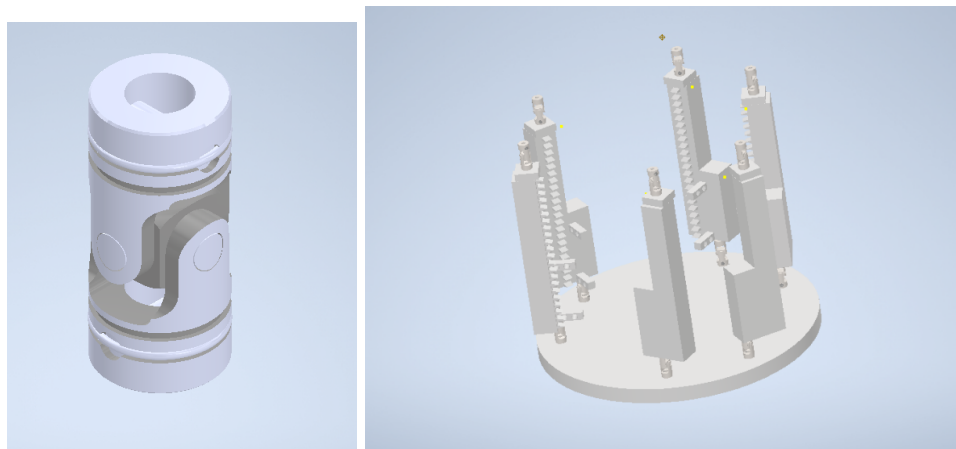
U clip (left) and Stewart platform assembly (right) CAD models
